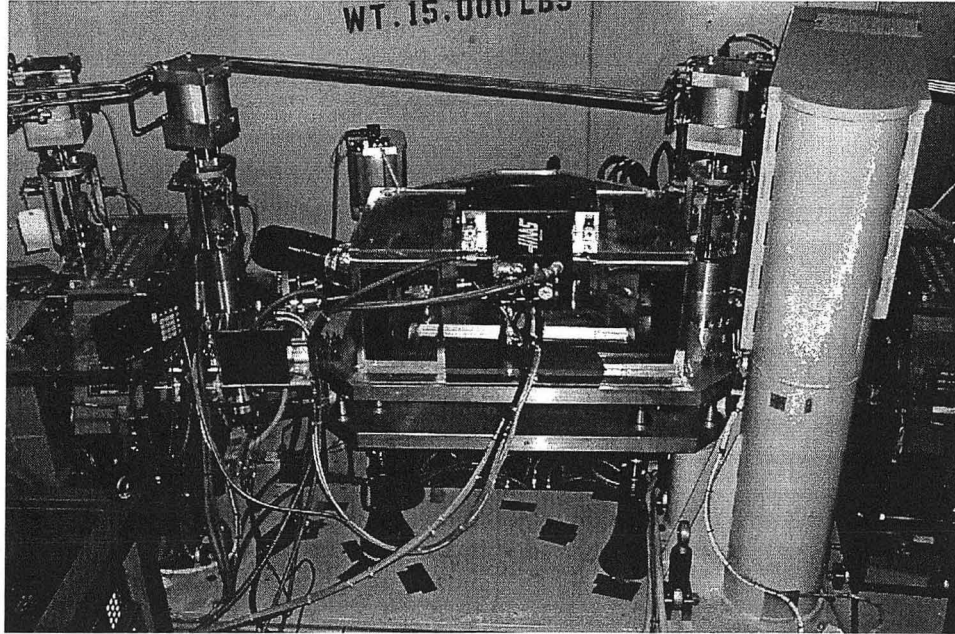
Machining Sector 4 Storage Ring Vacuum Chamber
